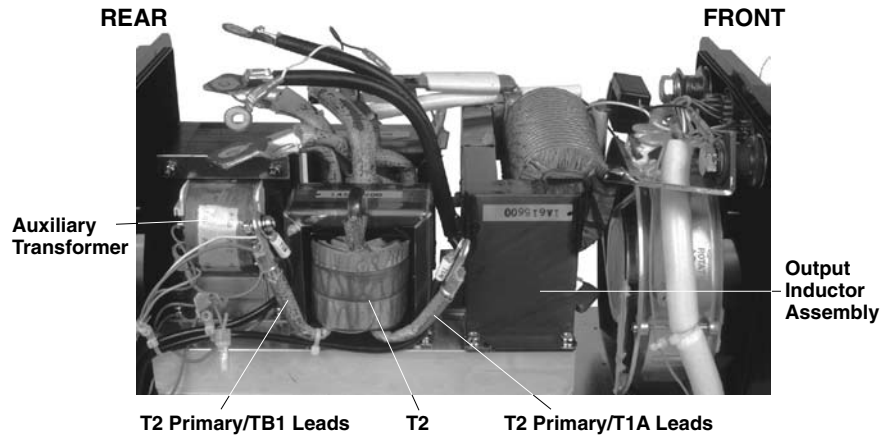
Preparation for removal of Main Transformers T1/T2 (shown in GMS model, right side of unit)
